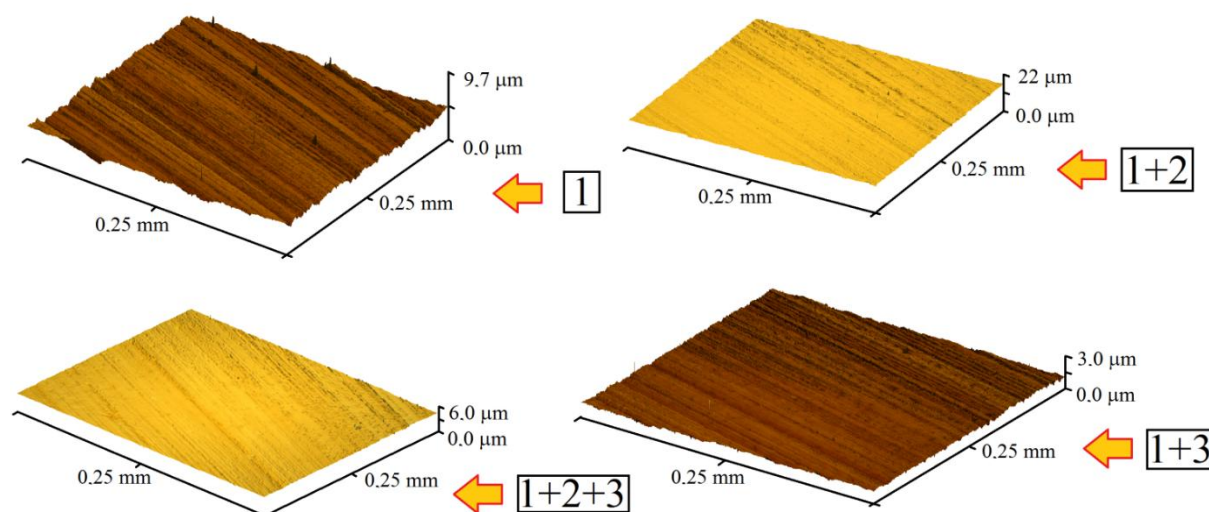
Profile of the front surface of carbide inserts after grinding with diamond wheels:
